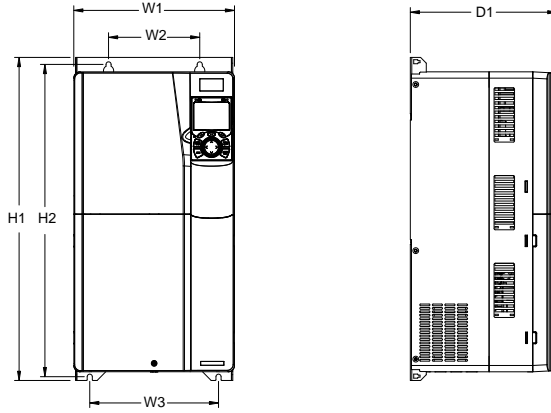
Wall-mounting diagram for 380V 45-75kW models
